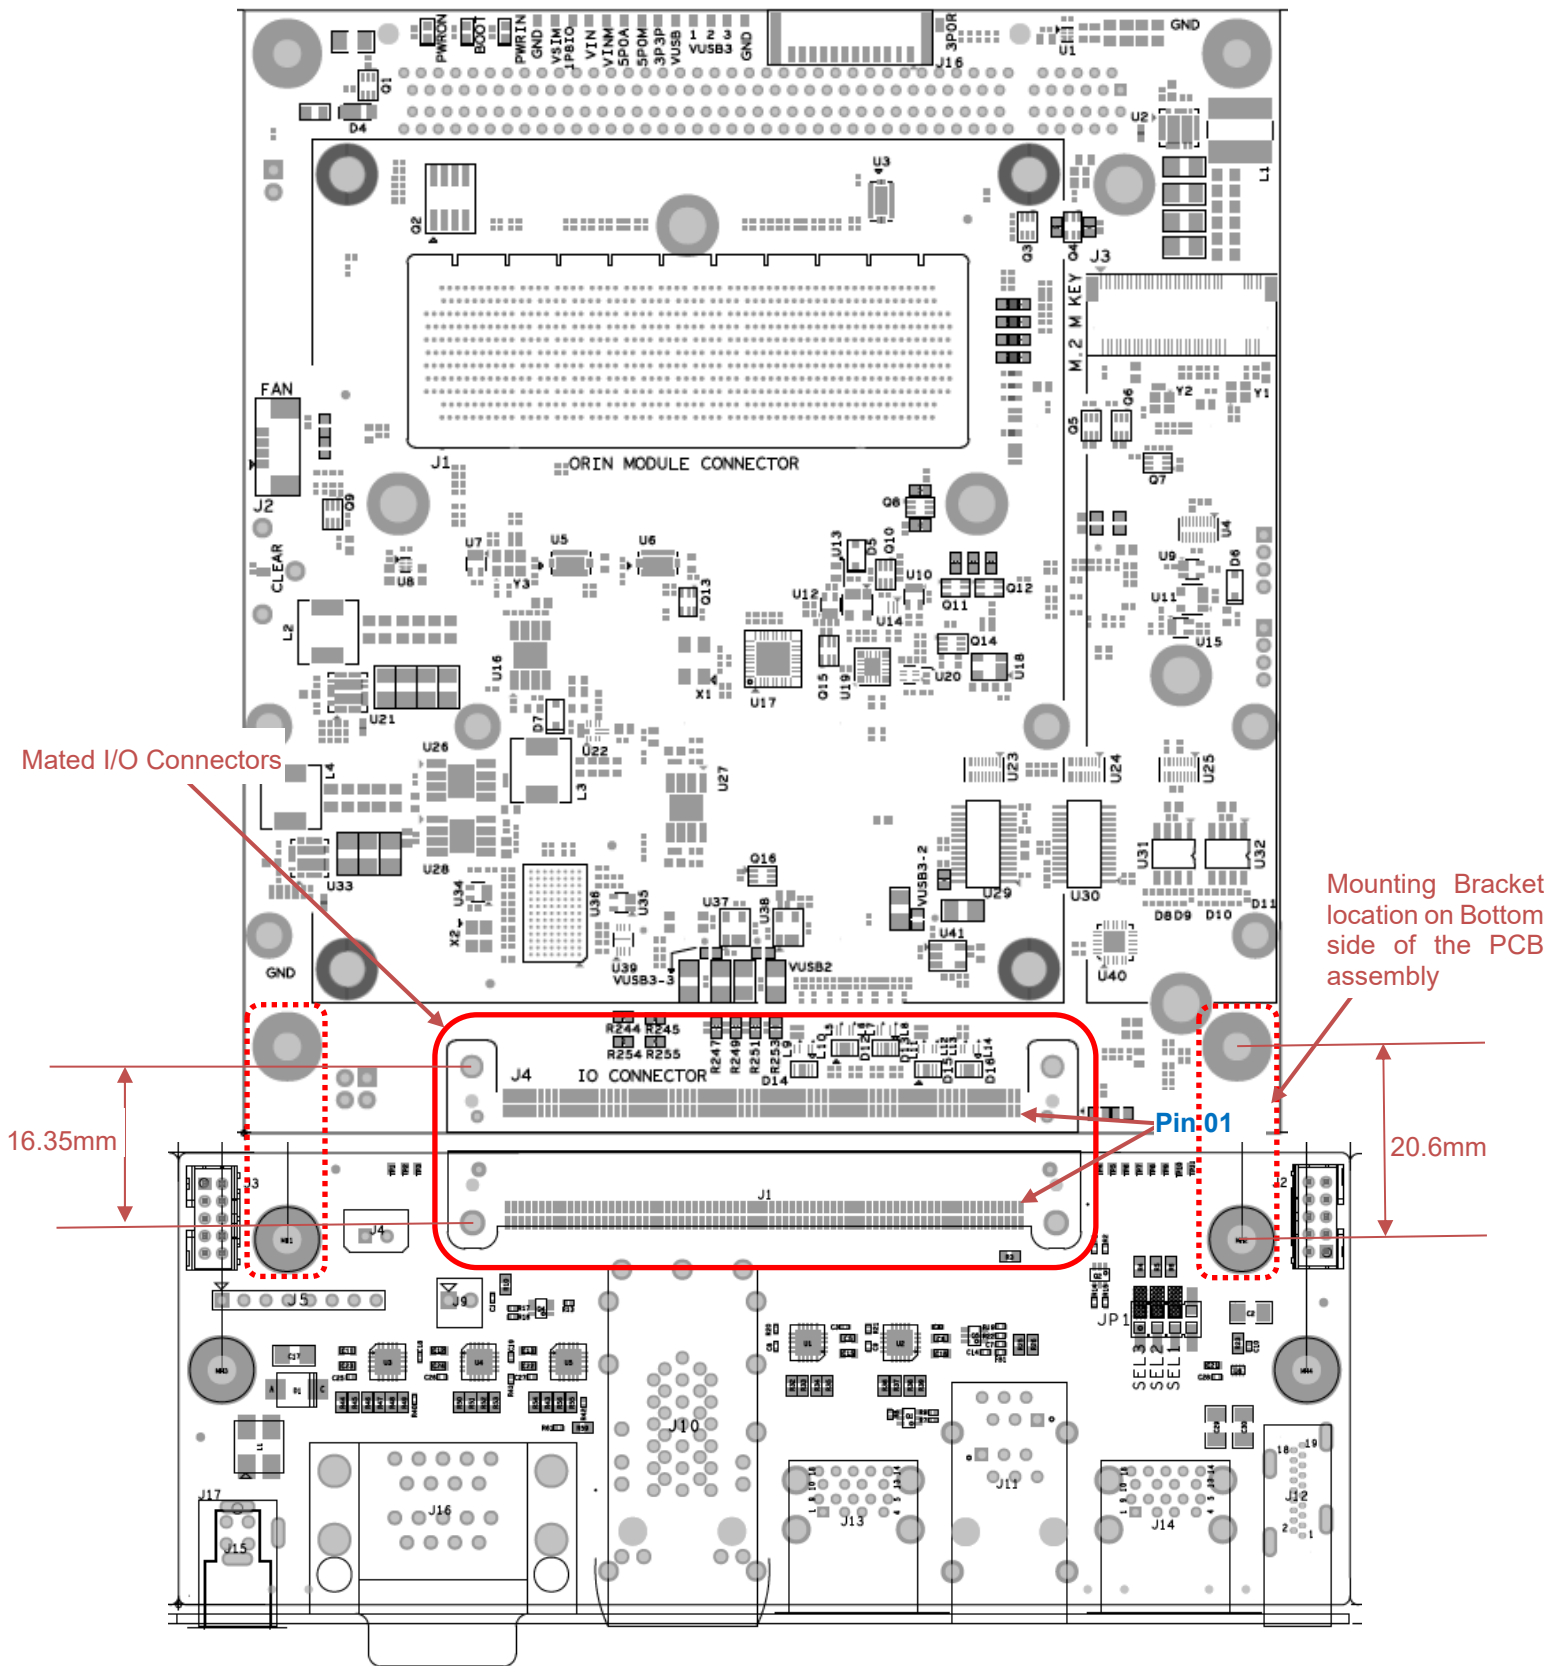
Osbourne Main Board and Sample I/O Board Mated View
